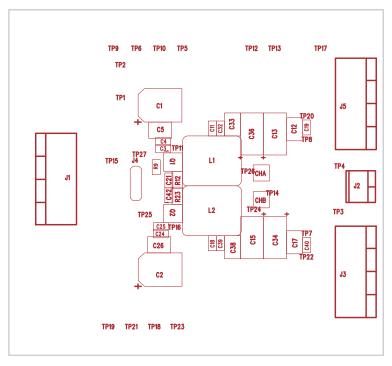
TPS40322EVM-074 Top Layer Assembly Drawing (top view)
